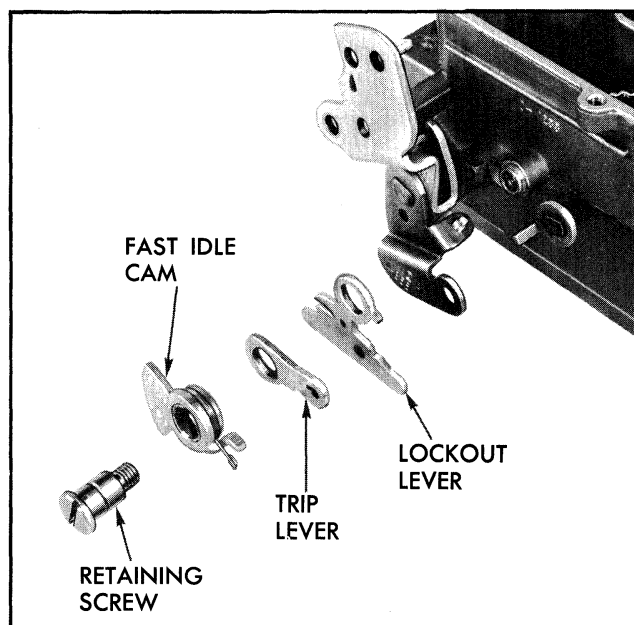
B-92 Lockout Lever and Fast Idle Cam
